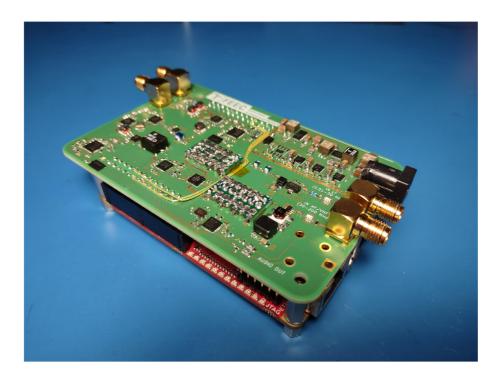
Image of final PCB stacked on Red Pitaya
